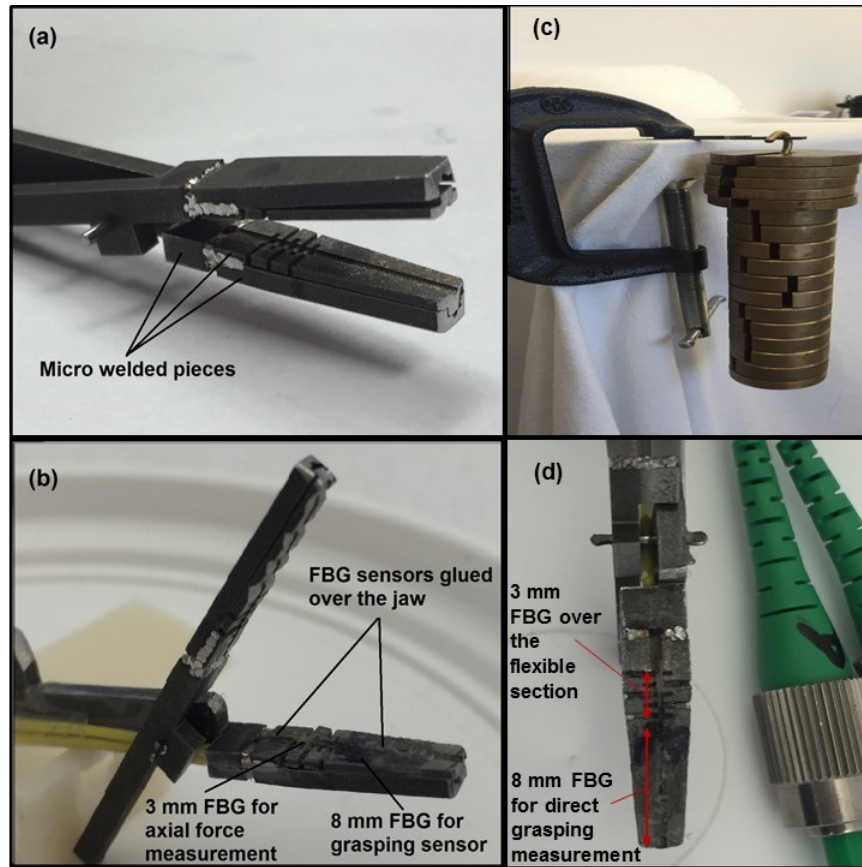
a) Assembled and welded parts; b) Sensorized jaw; c) Weld strength test at 17 N load; d) Installation of FBG fibres on the grasper (used with permission) [153].
